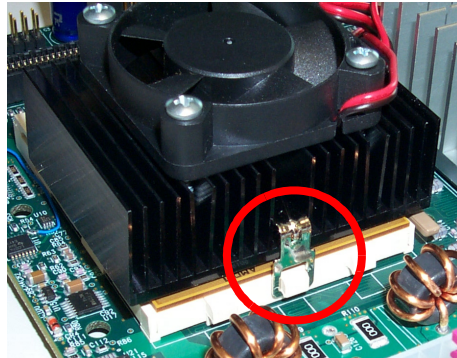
Heatsink Clip Connected to Front of Processor Socket
